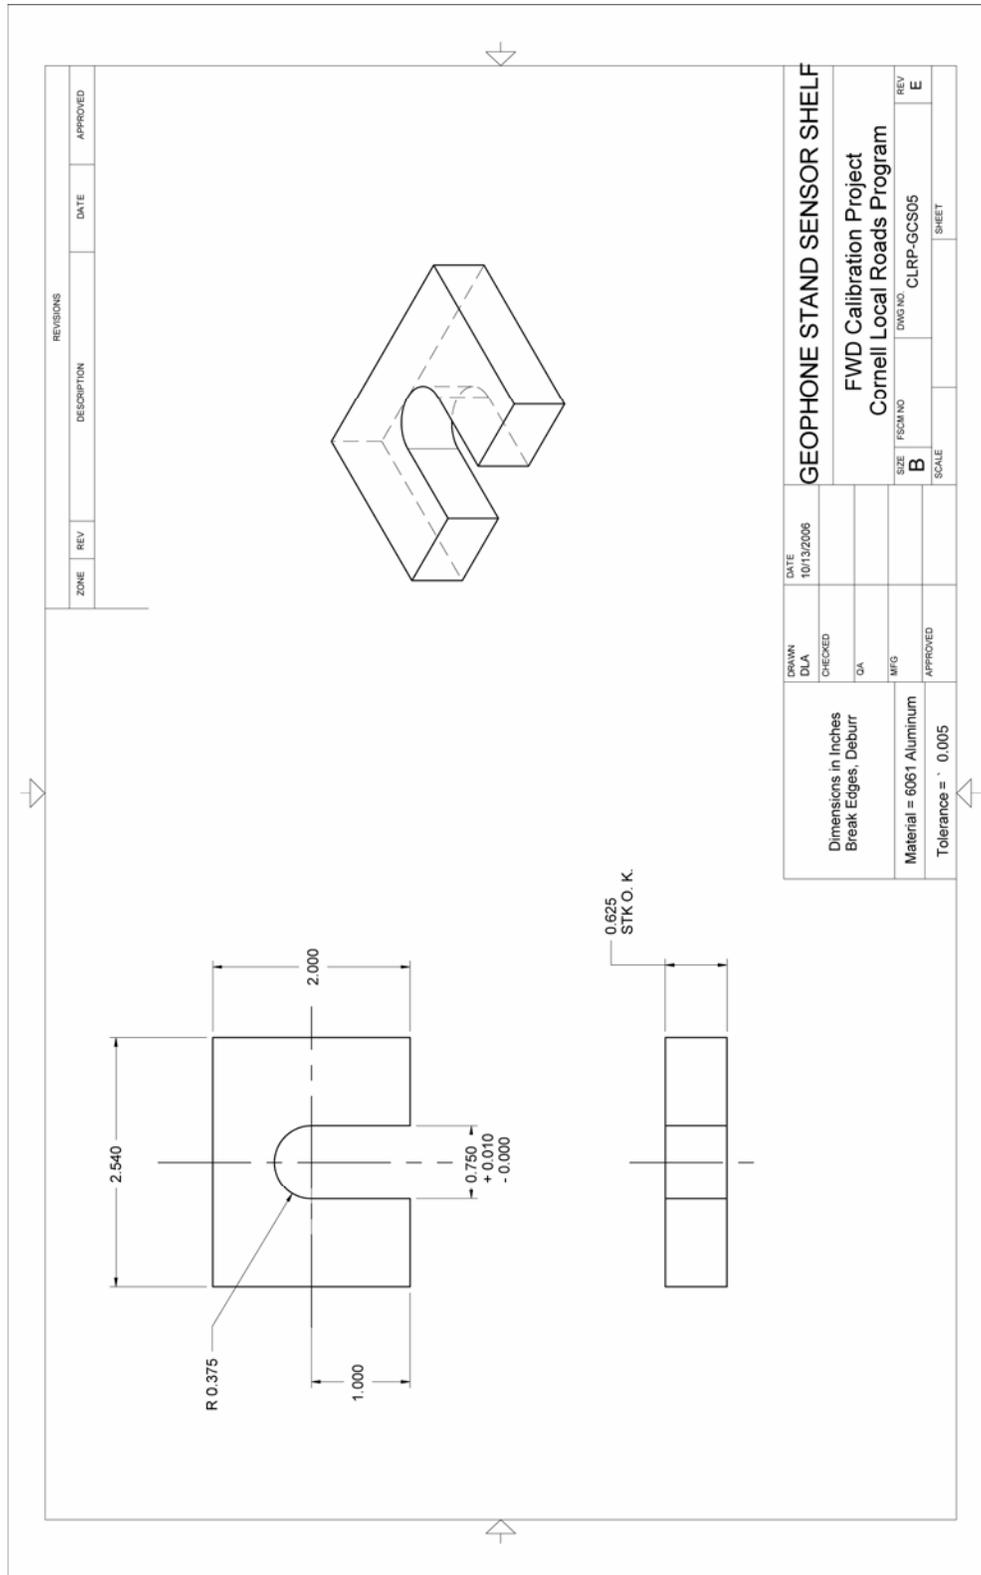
Drawing. CLRP-GCS05 Geophone Stand Sensor Shelf.
